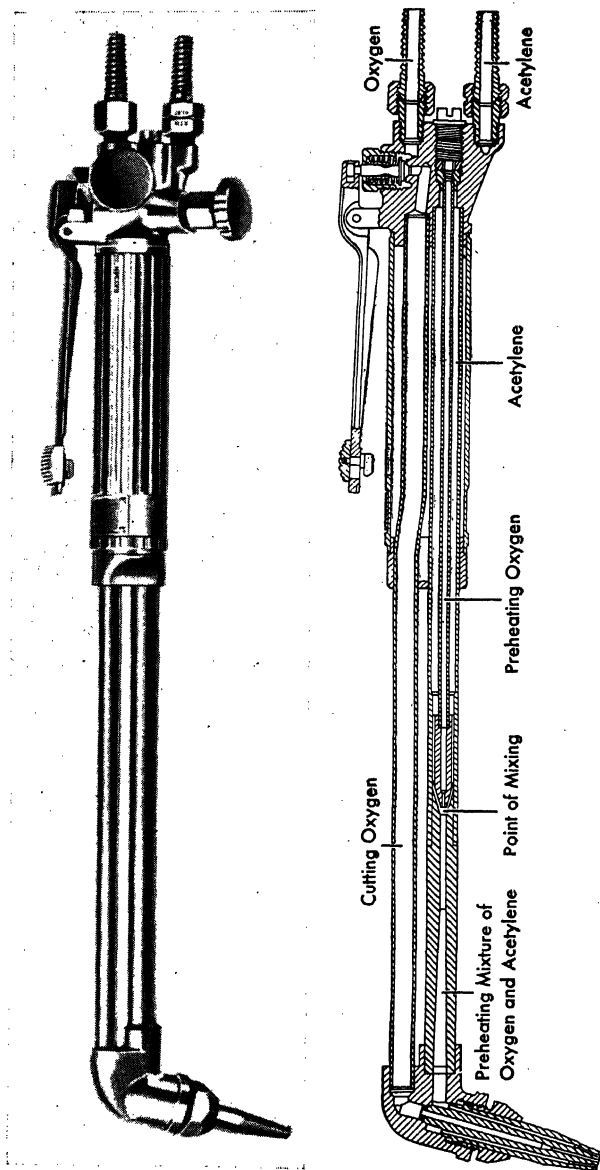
Cutting torch. (Courtesy of Linde Air Products Co.)
